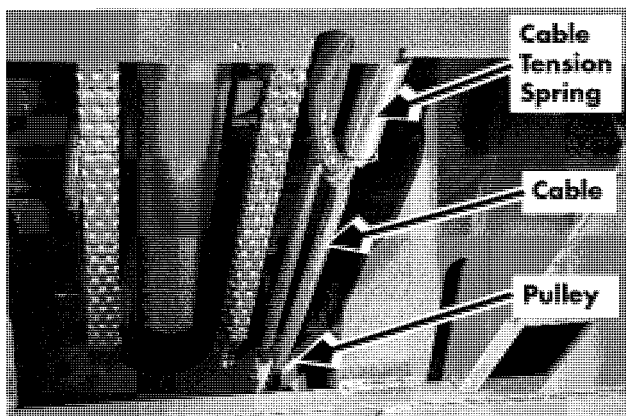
Electrical Over-the-Mast Cable, Front Side of Platform
